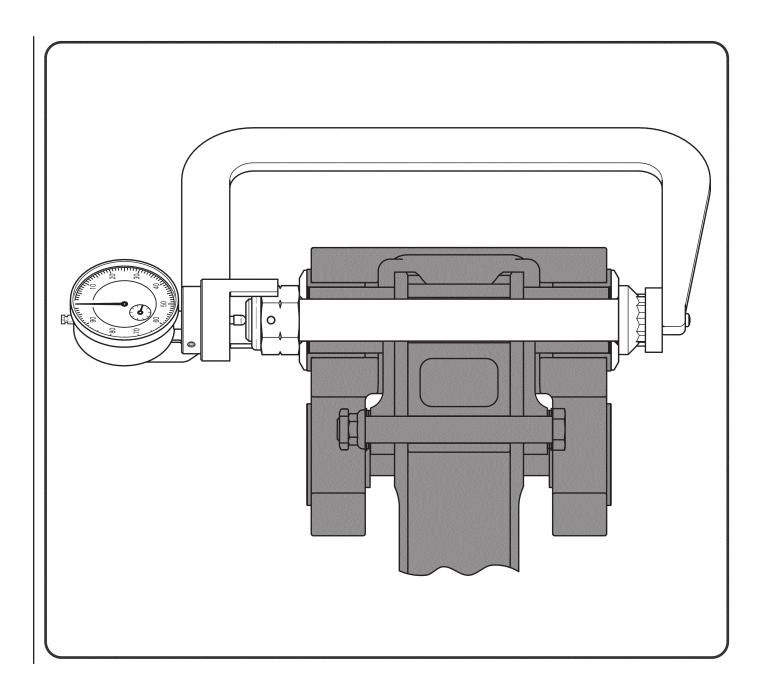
MEASURING BOLT STRETCH (SHOWN ON TEETER BOLT, BLADES REMOVED)
